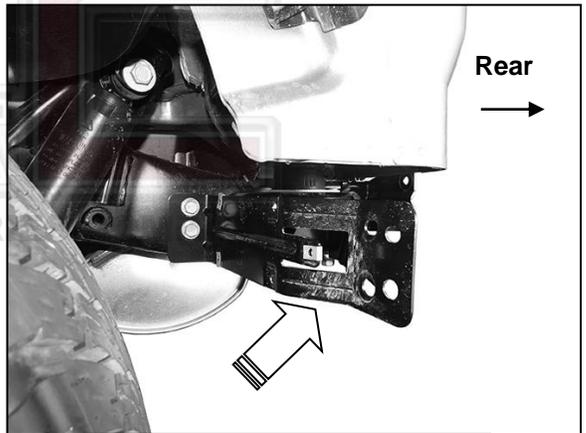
Remove (2) hex bolts (if equipped) attaching bottom of bumper to cross member
